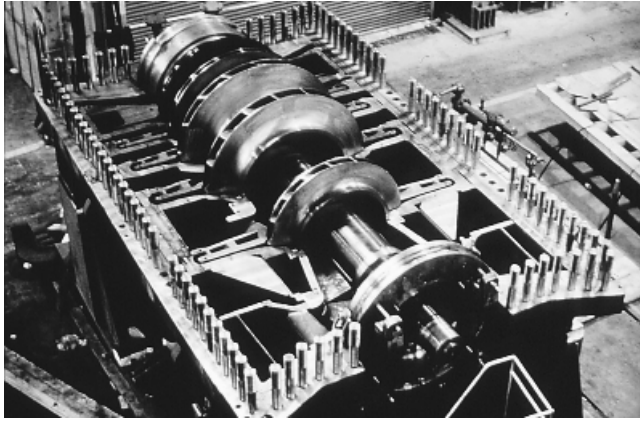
Horizontally split fabricated compressor, lower casing half. (*Dresser-Rand Company, Olean, N.Y.*)
